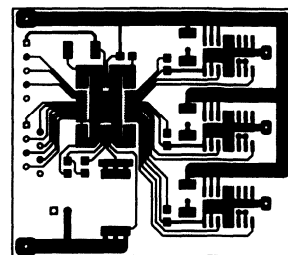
shows a sample PC board layout using the Si9979 with Si9940 MOSFETs. The overall dimensions of this board are 2.1" × 1.85". This size board can be mounted directly on a motor.
